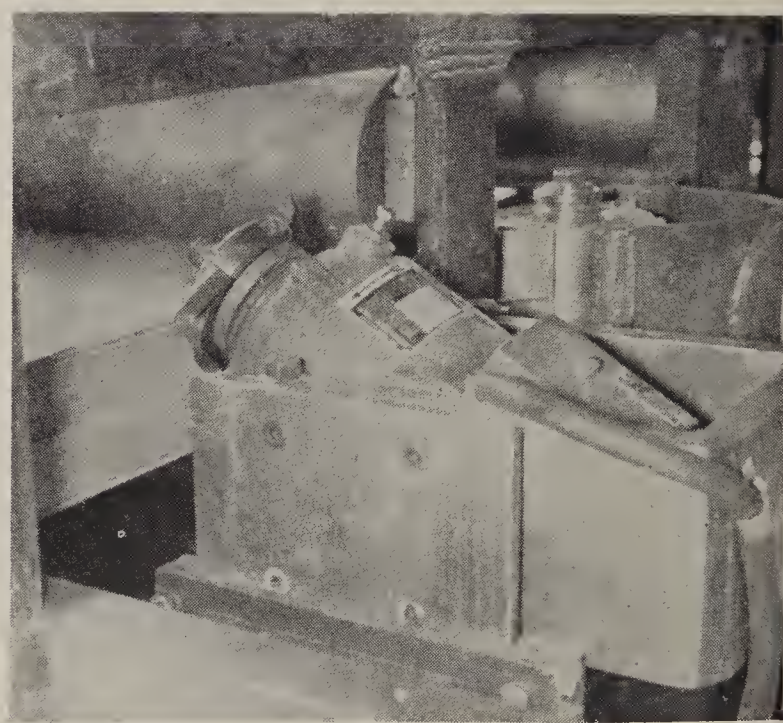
Shaper-type cutter head set at an angle to groove a panel edge for a special joint.
